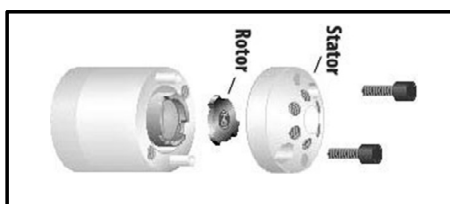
Exploded view of the ViciCheminert® selection valve (www.vici.com).
